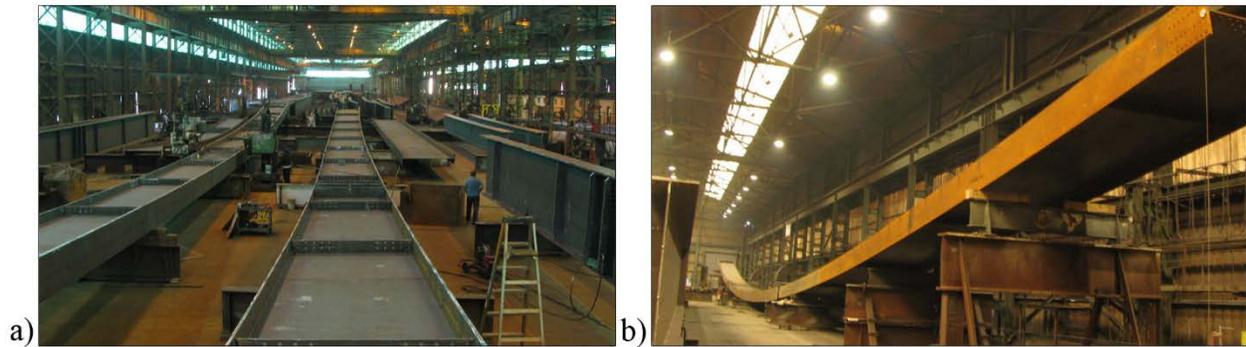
Laydown Process in a Typical Fabrication Shop Requires Substantial Floor Space for Both a) Straight Girders and b) Curved Girders
